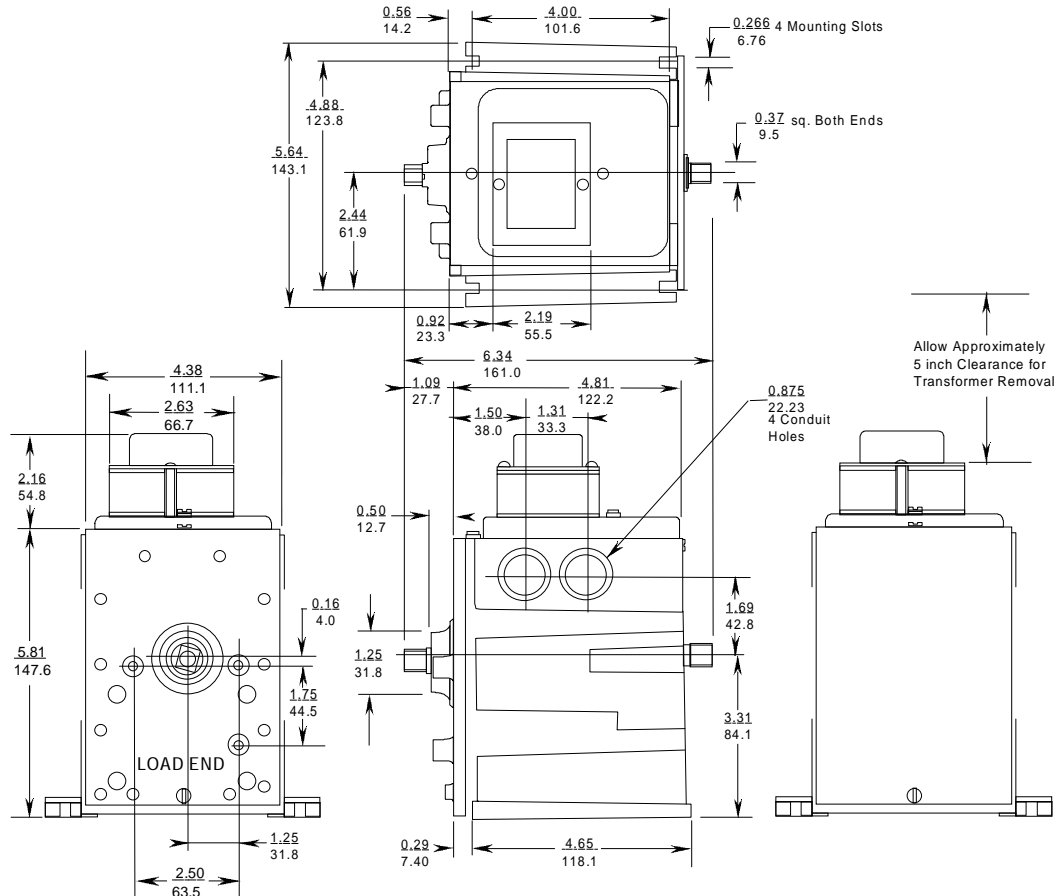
M100 with Cover Mounted Transformer Dimensions inches/mm
